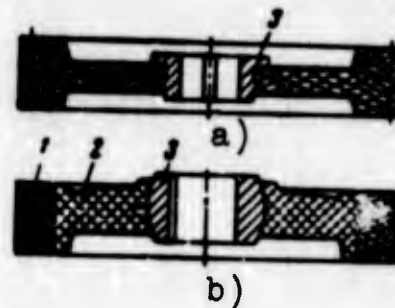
Molded gear wheels. a) wheel with rim from round sheets of bakelized fabric; b) from segment strips of bakelized fabric.
